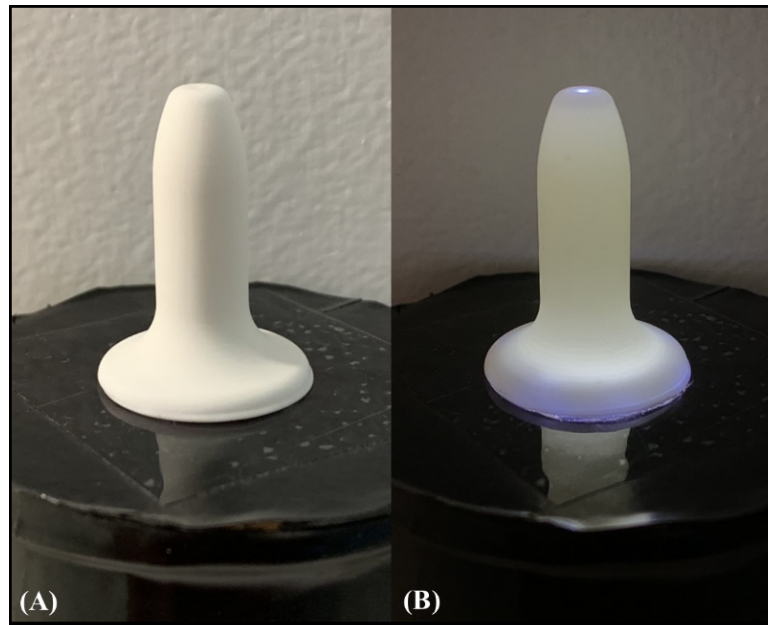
Shows a sintered sample on the flashlight to check for cracks. (A) normal optical inspection, (B) illuminated optical inspection
